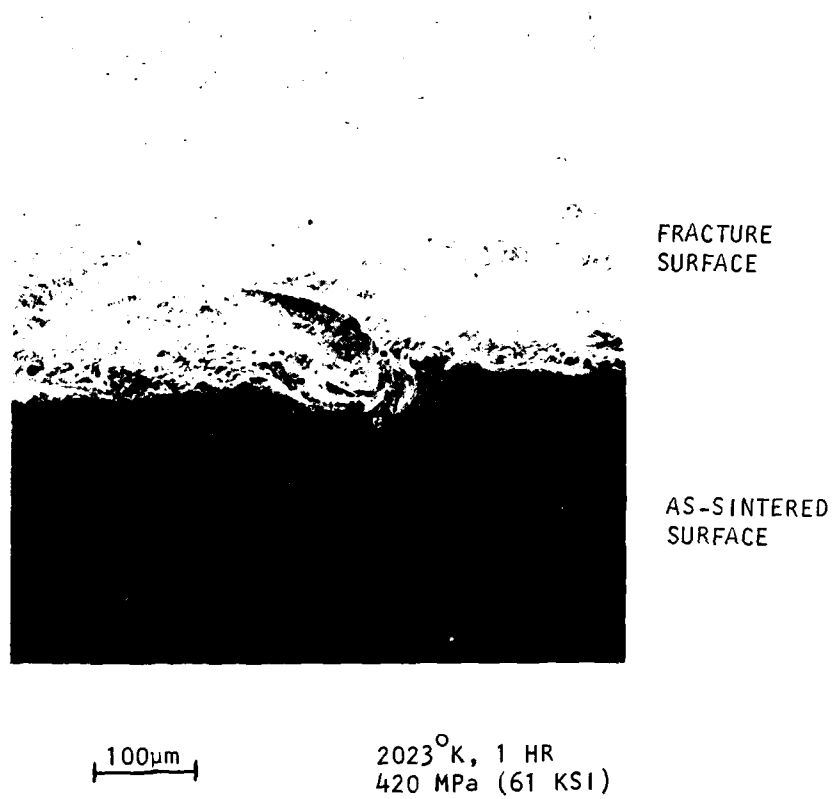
Apparent Fracture Origin in 61 KSI MOR Test Specimen
